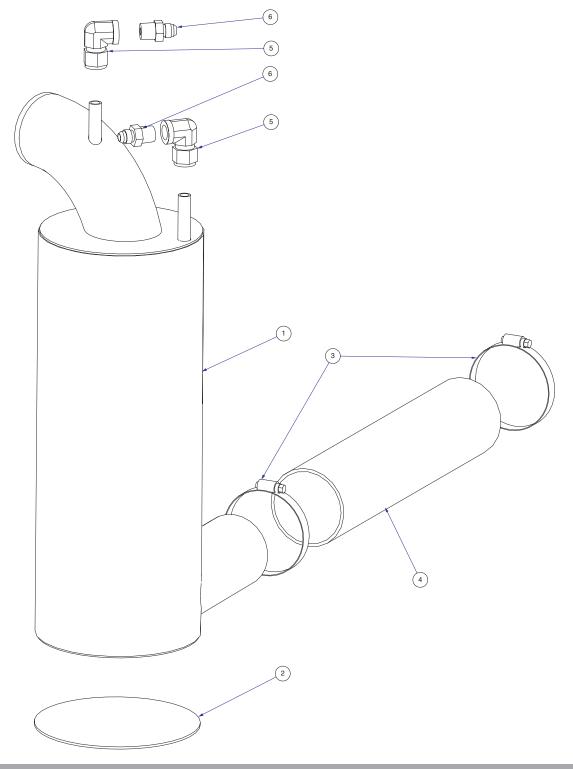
Coolant Heat Exchanger Assembly D-5523 Rev A
